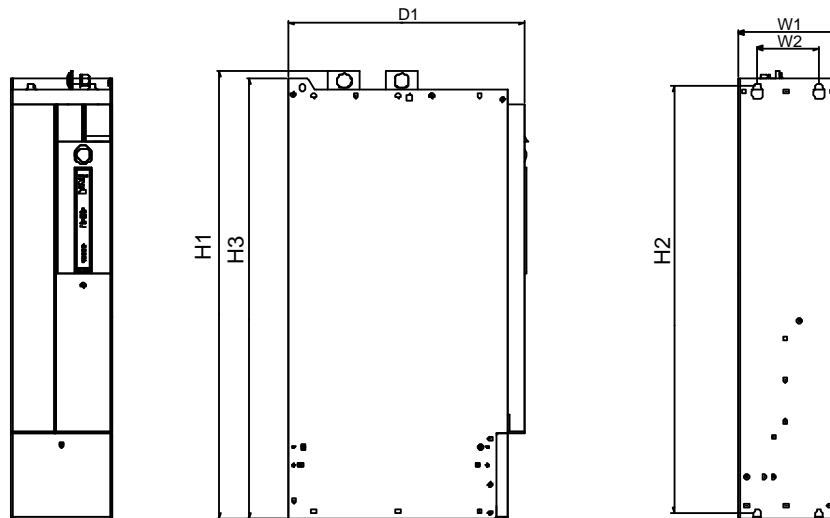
Wall-mounting drawing for the 380V 355kW rectifier unit
